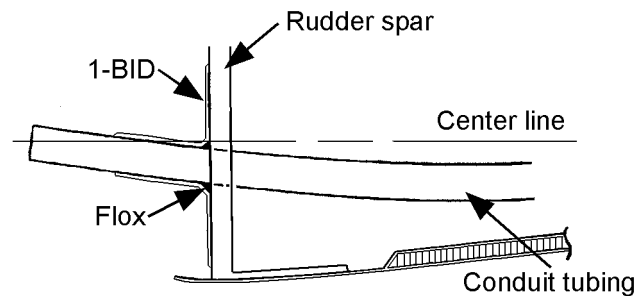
G.3 Securing conduit tubing with 1-BID reinforcement
